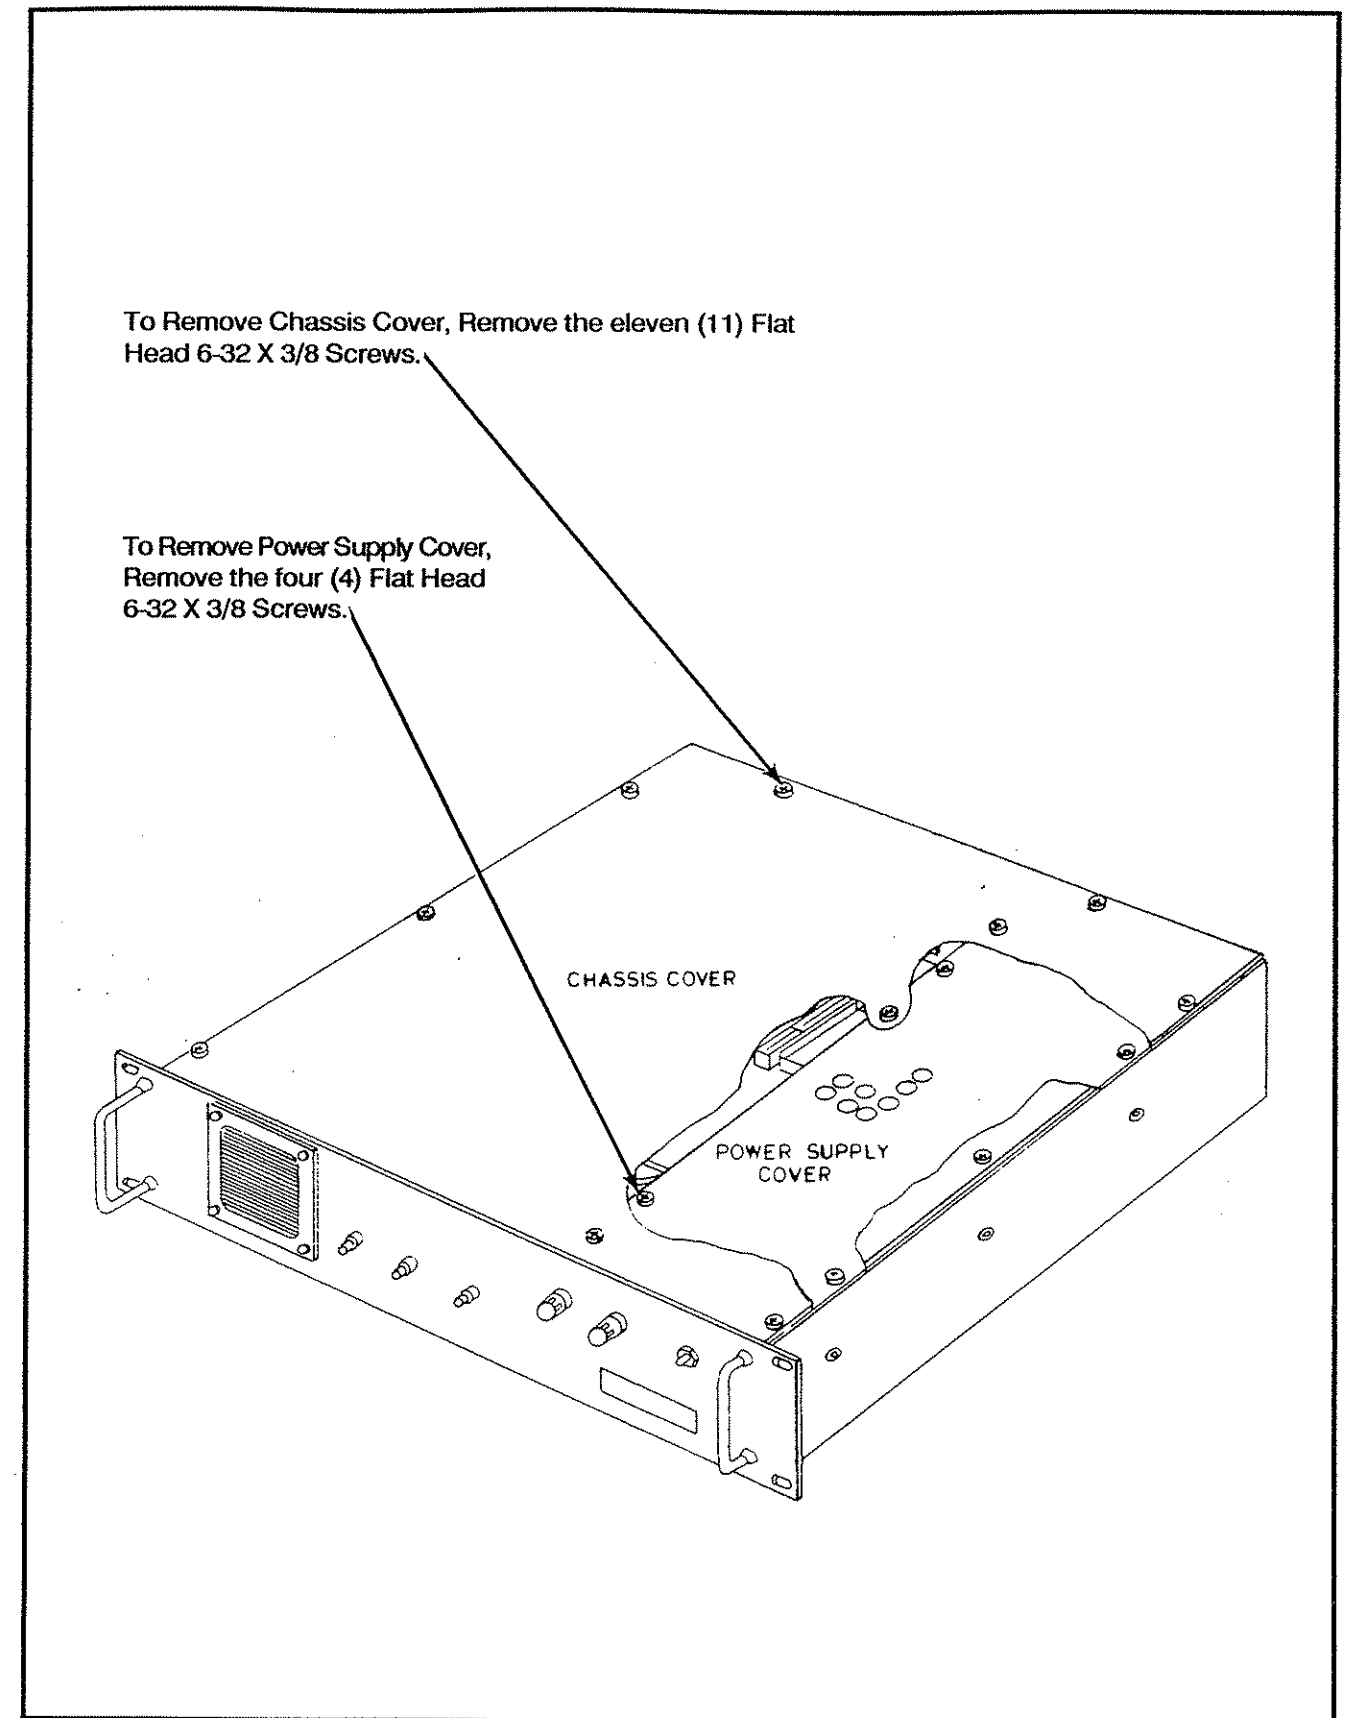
Removal/Installation of Chassis and Power Supply Covers.
